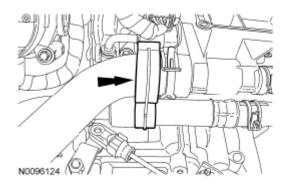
Identifying Coolant Hose Retainer Courtesy of FORD MOTOR CO.
